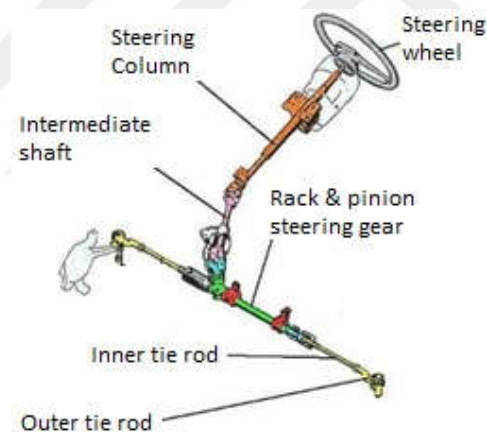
Rack and pinion mechanical steering system and its parts. [1]
